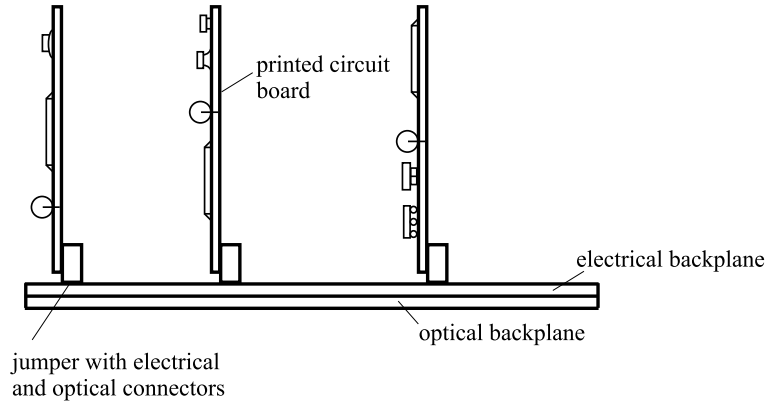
Optical connection between printed circuit boards by an optical backplane that couples the board optically.
